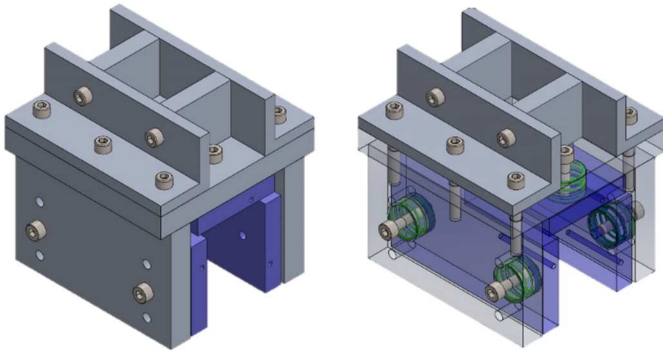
Linear Bearing Test Rig Clamp with sprung bearing pads
